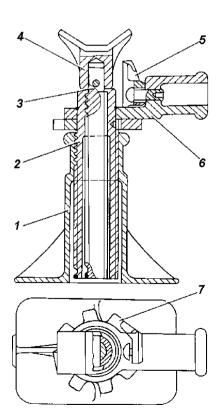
Jack: 1 -body; 2 -external screw; 3 -internal screw; 4 -head; 5 -pawl; 6 -handle; 7 -ratchet
